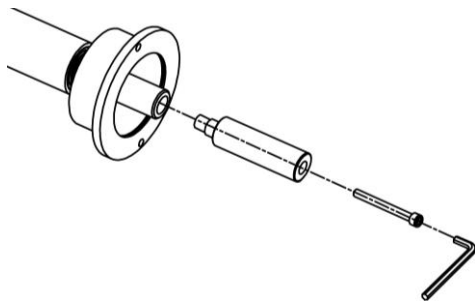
E01 , E02 Shaft Lead Screw Assembly
